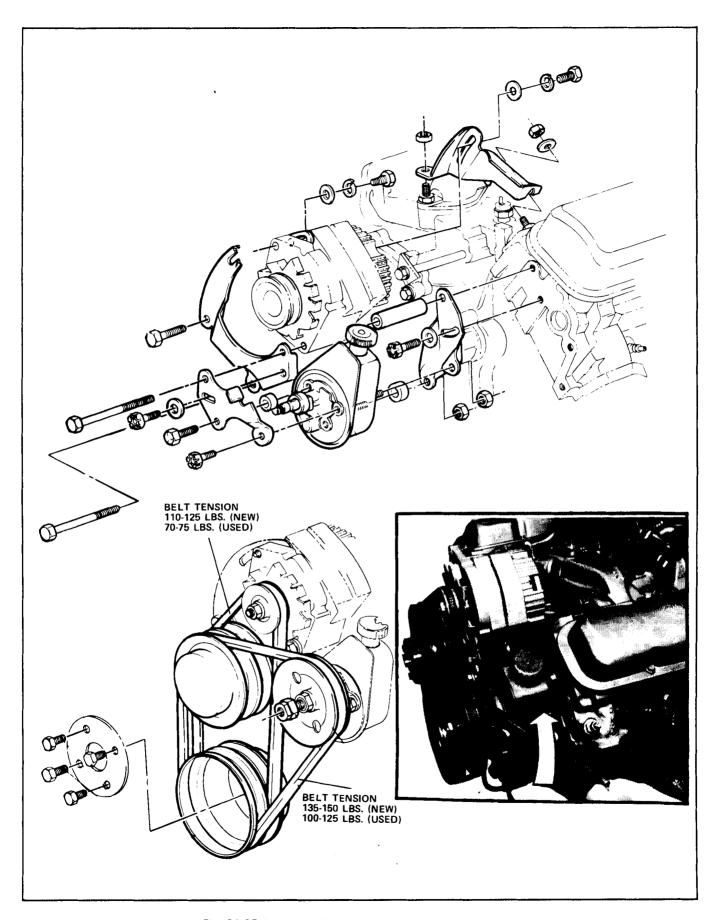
A-35 Accessory Drive - Power Steering Mounting (V-8)
